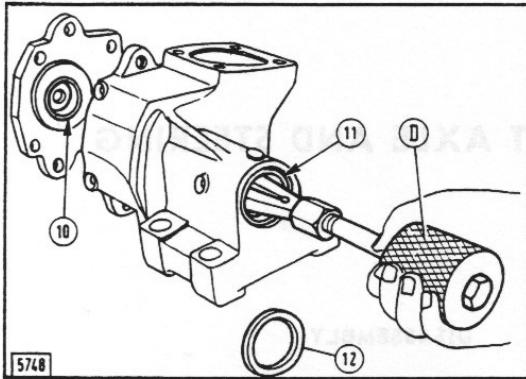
Removing steering box nut shaft bushing (11) by means of puller. (10) Cover bushing. (12) Oil seal.
